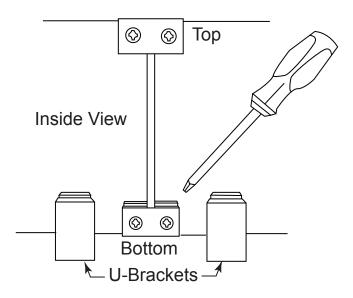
Securing the straight bracket and two bottom foot supports with the Phillips screwdriver.
